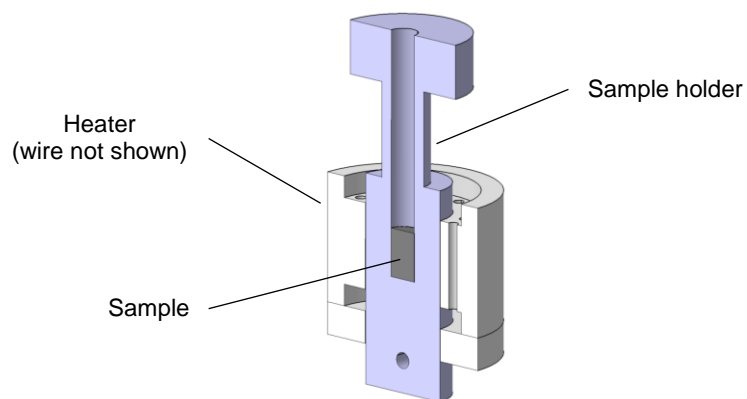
CAD model cut view of the sample holder and the ceramic heater
